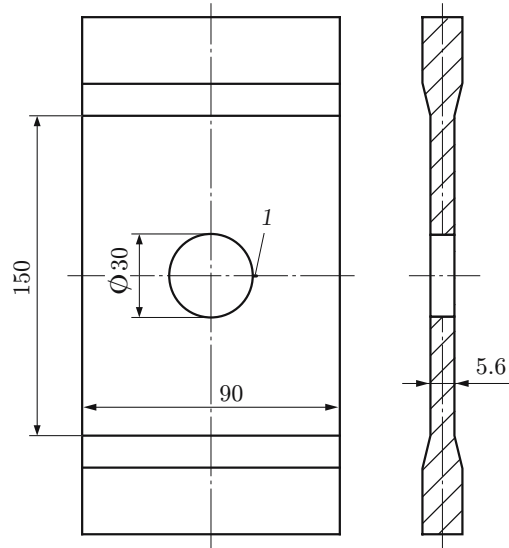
Geometry and dimensions of the sample: 1 is the notch initiating a crack.
